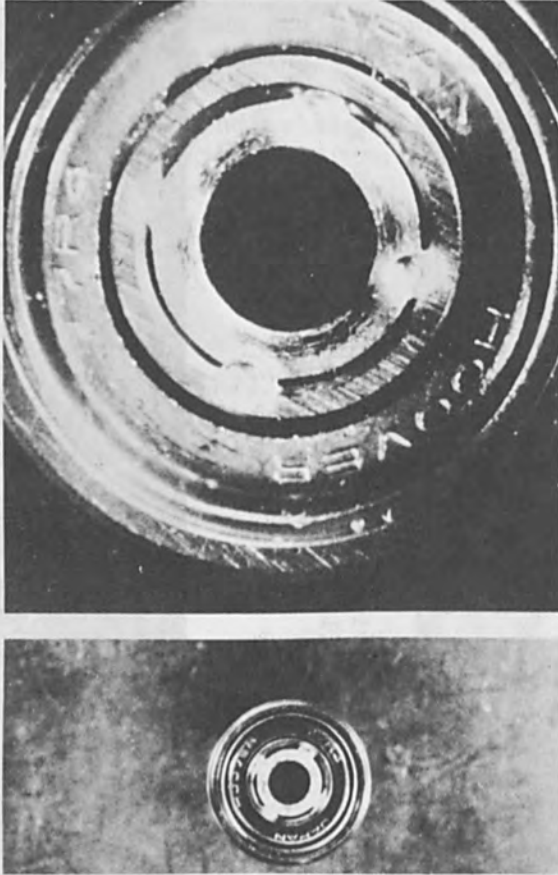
Attachment of ballbearings and bushings to heat-treated gear shafts.
